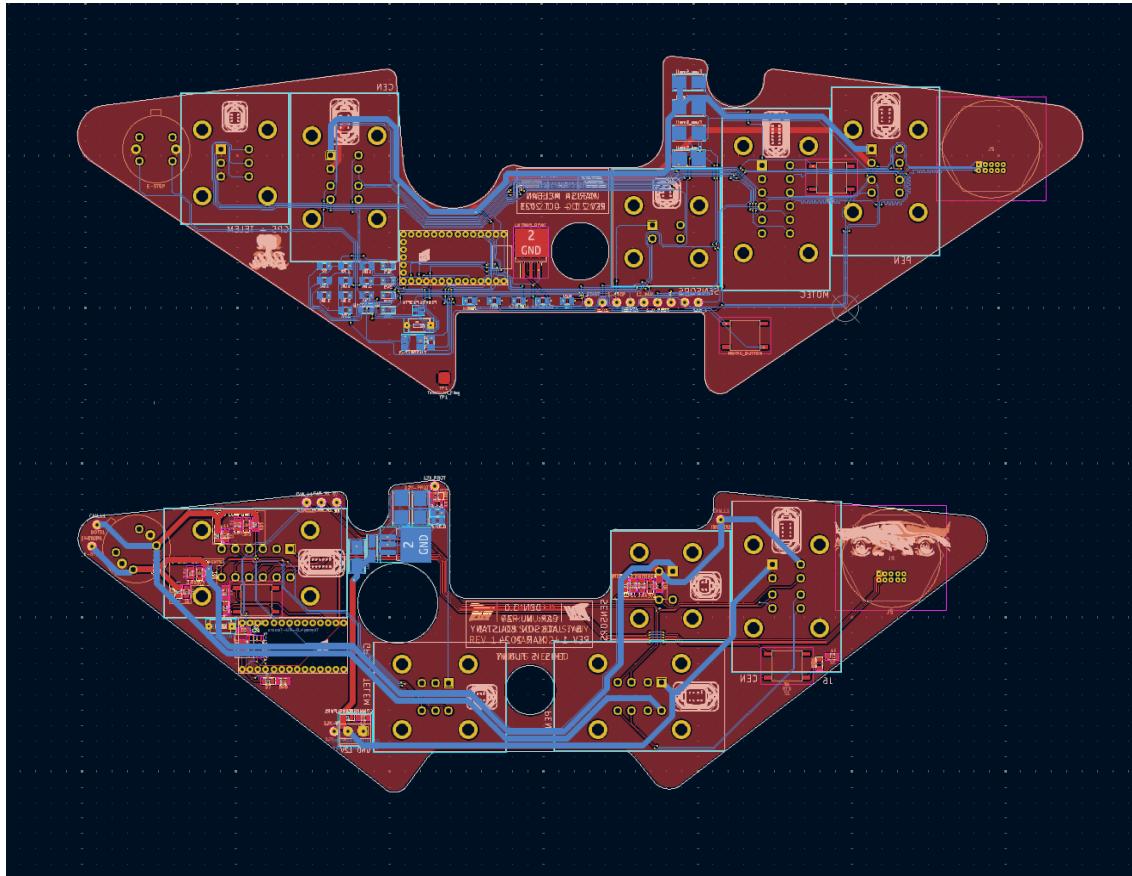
Board size and layout of DEN V2.1 (top) and DEN V3.0 (bottom)
